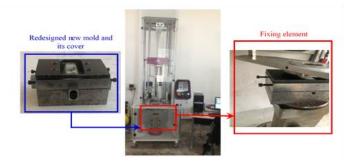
Redesigned Mold and its Screw-Fixed Cover.
